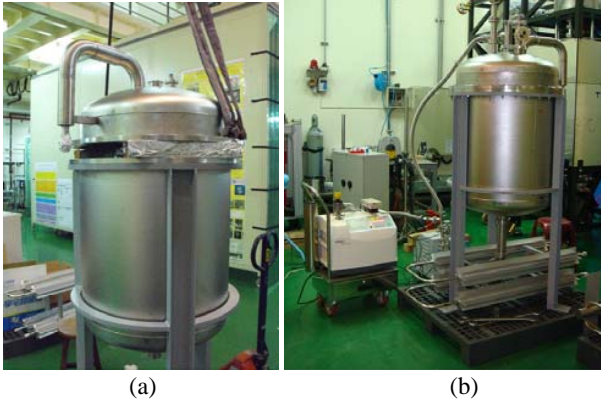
The nitrogen vessel is inserted into the vacuum shielding vessel and assembled with all the instruments, pipes, and passive warmer, and then leak checked with a leak detector to examine all the welds and vacuum seals
